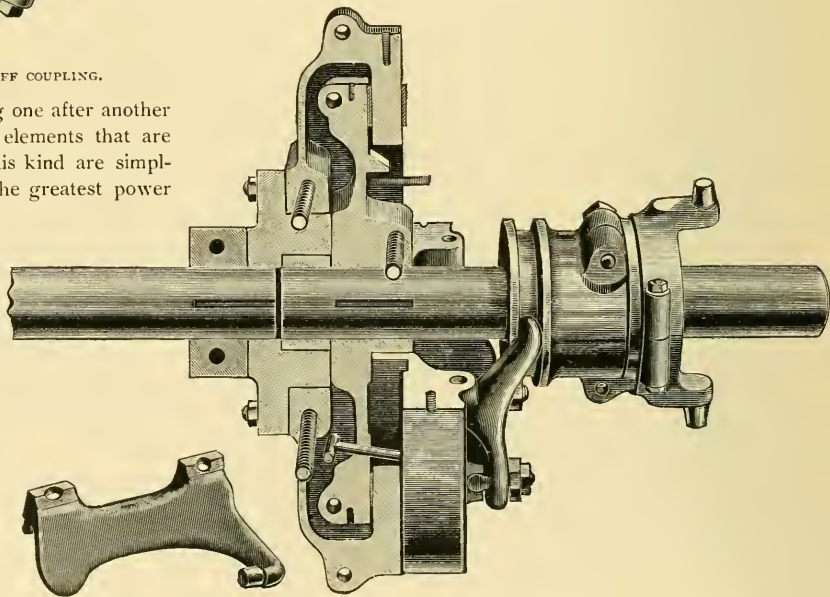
FIG. II—SECTIONAL VIEW OF CUT-OFF COUPLING.
